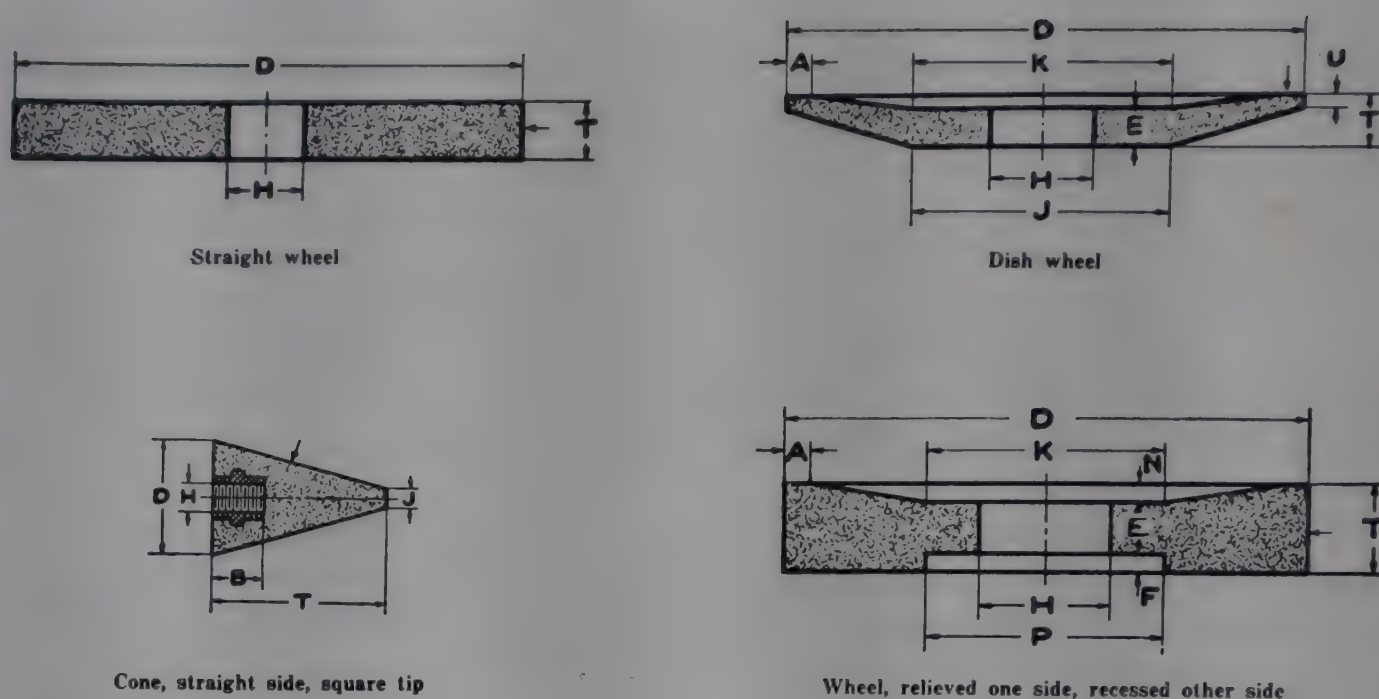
Shape types of grinding wheels (12). Courtesy Grinding Wheel Institute.
